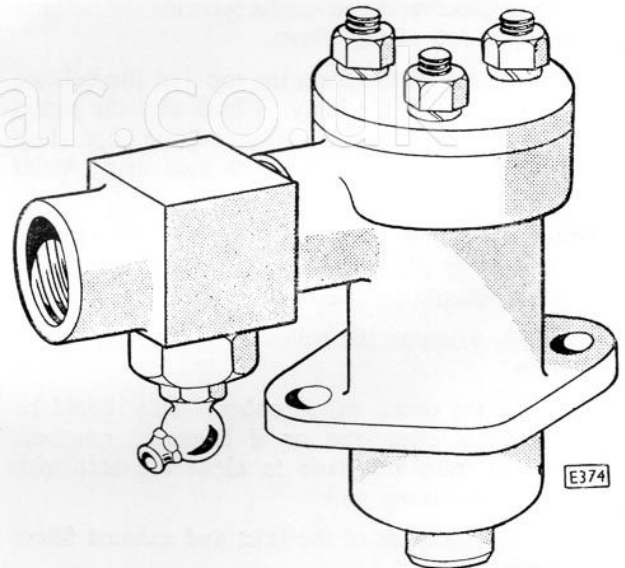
Throttle control motor piston and cylinder assembly showing lubricator
